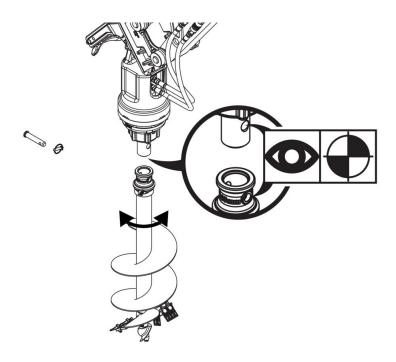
Ensure auger drive shaft and auger tool receptacle are compatible.Rotate auger tool and ensure mounting hole points are aligned. Fig. 36
